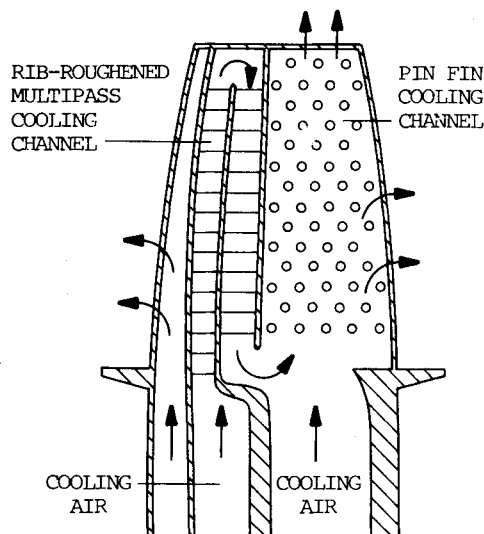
Cutaway view of a typical modern internally cooled gas turbine blade.
